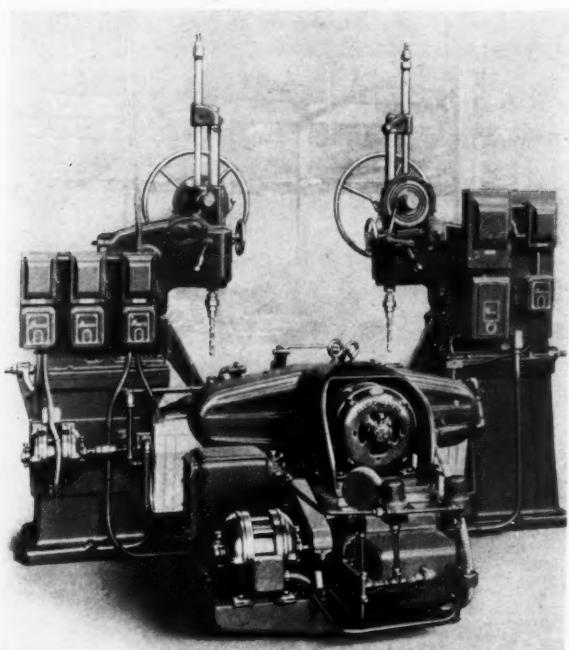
Production drill embodies five motors with standard controls mounted on back of machine
